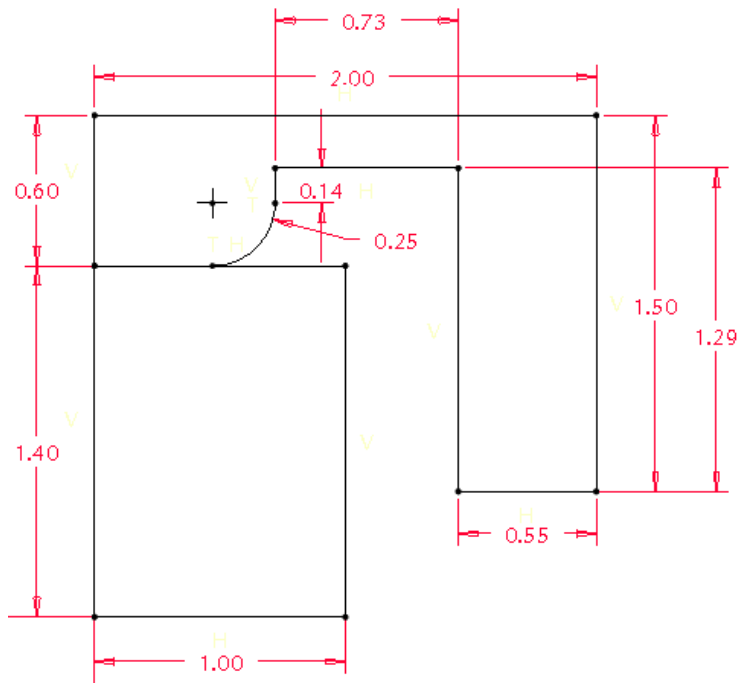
One/Eighth Portion of the 3D Forging Assembly
